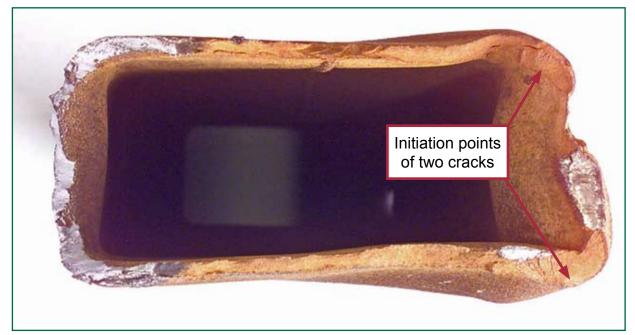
The stanchion stub end fracture face (photograph courtesy of Serco Technical & Assurance Services, Derby)
